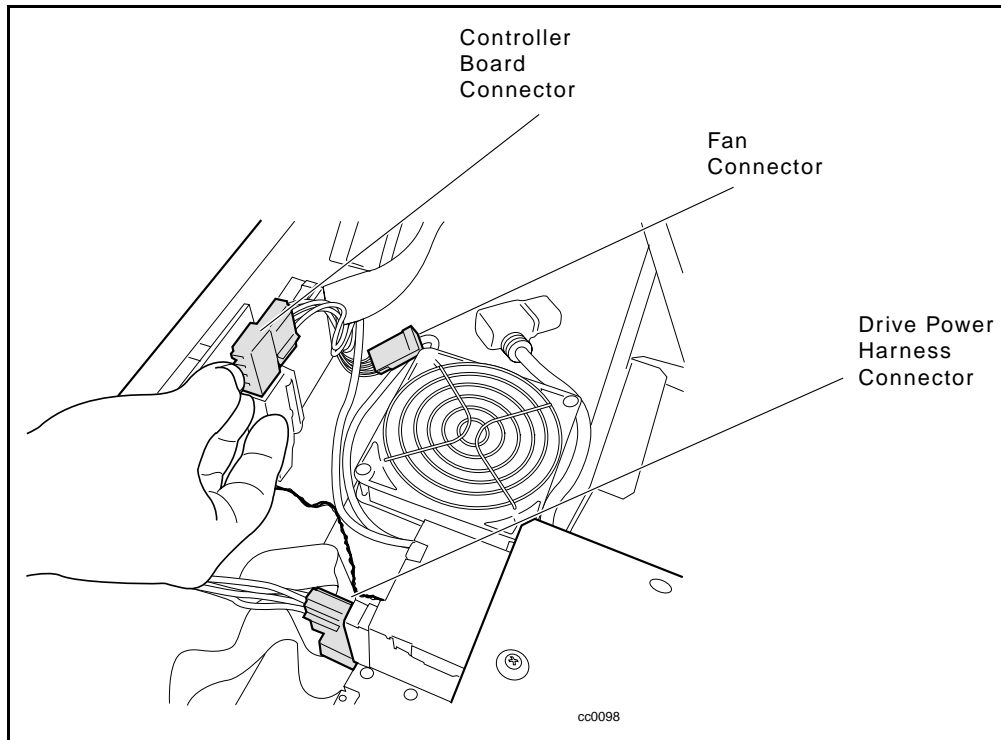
Disconnecting the controller board, fan, and drive power harness
